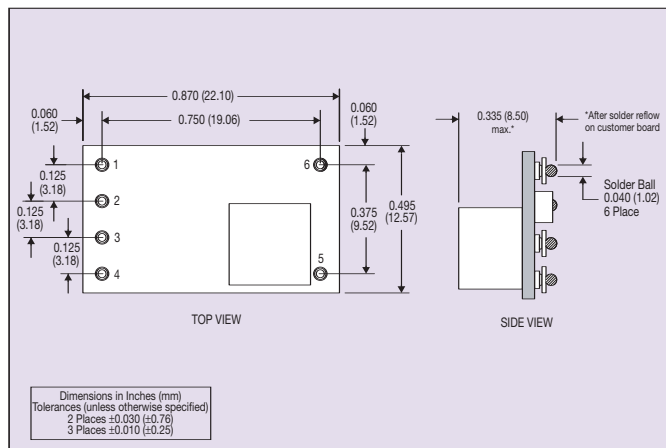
Surface Mount Mechanical Drawing - Suffix S
